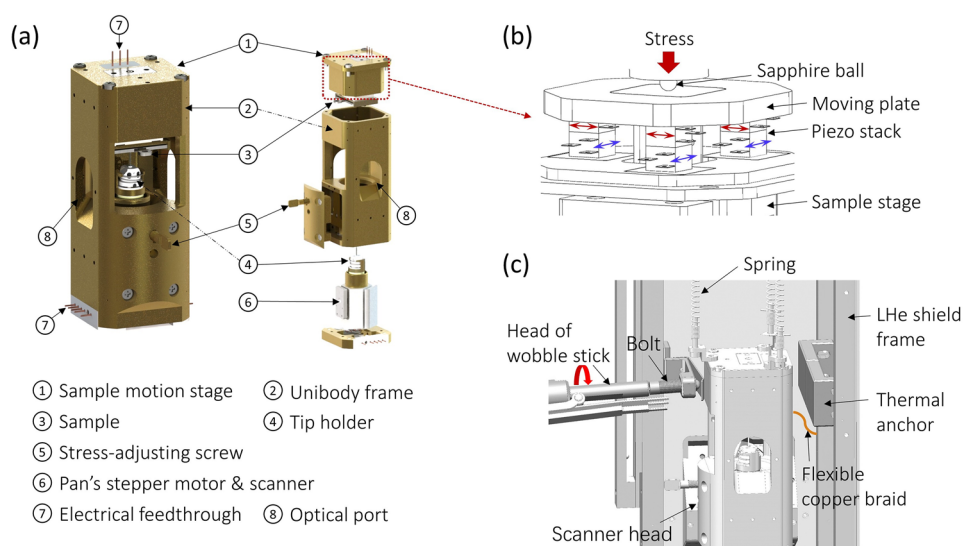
Structure and cooling mechanism of the scanner head. (a) 3D model and exploded view of the scanner head. The stepper motor for tip-approach is based on Pan's design, with a travel distance of 8 mm. The sample is placed on a sample stage module with a moving range of 5 mm × 5 mm. Two optical openings are machined on both sides of the frame for optical access. (b) The structure of the IPM inside the sample stage. The moving directions of the piezo actuators are shown by red (X) and blue (Y) double arrows. The stress can be adjusted by a screw at the top of the sample stage. (c) The section view of the scanner head inside the LHe shield. The scanner head is levitated by three springs. One flexible copper braid, connecting the scanner head and the LHe shield frame, is used to increase the cooling efficiency. The scanner head can be clamped tightly against an OFHC copper thermal anchor mounted on the LHe shield frame by twisting a bolt shaft using the wobble stick.
